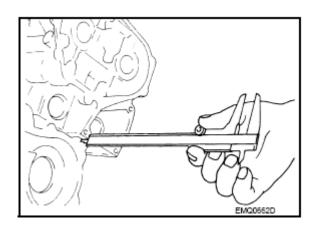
Measuring Distance Between Front End Faces Of Cylinder Block And Cylinder
